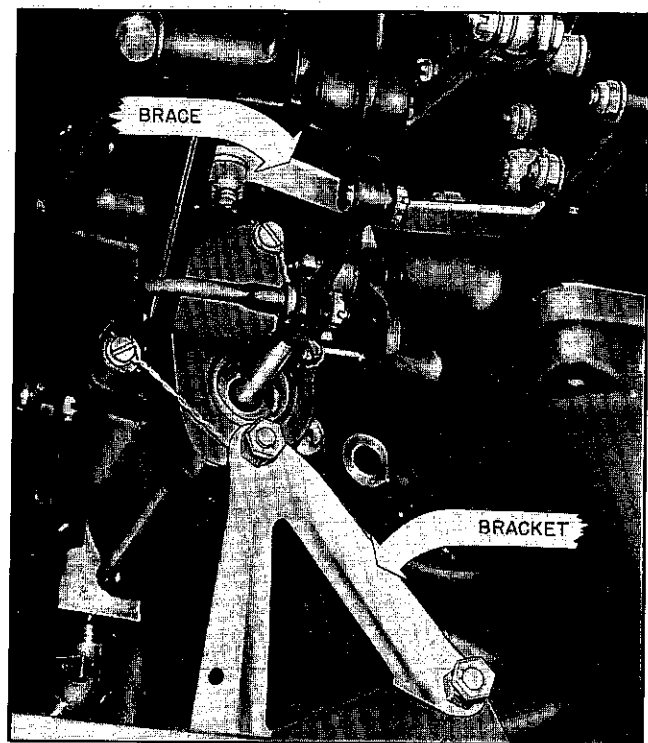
Location of Regulator to Carburetor Brace and Regulator to Vacuum Flange Bracket.
